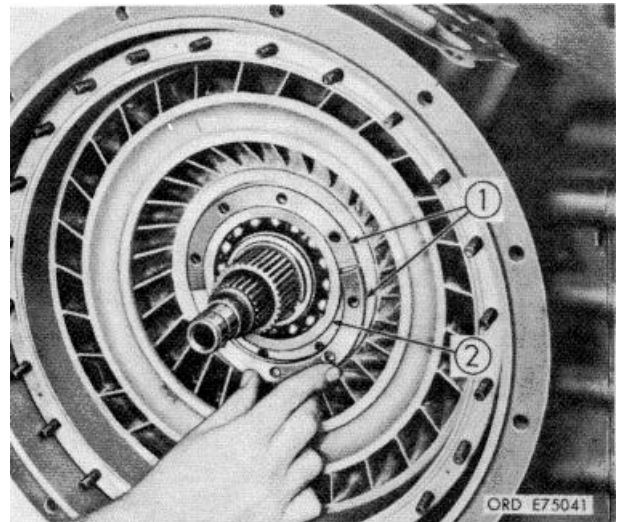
Removing (or installing) snapping which retains brake hub.
